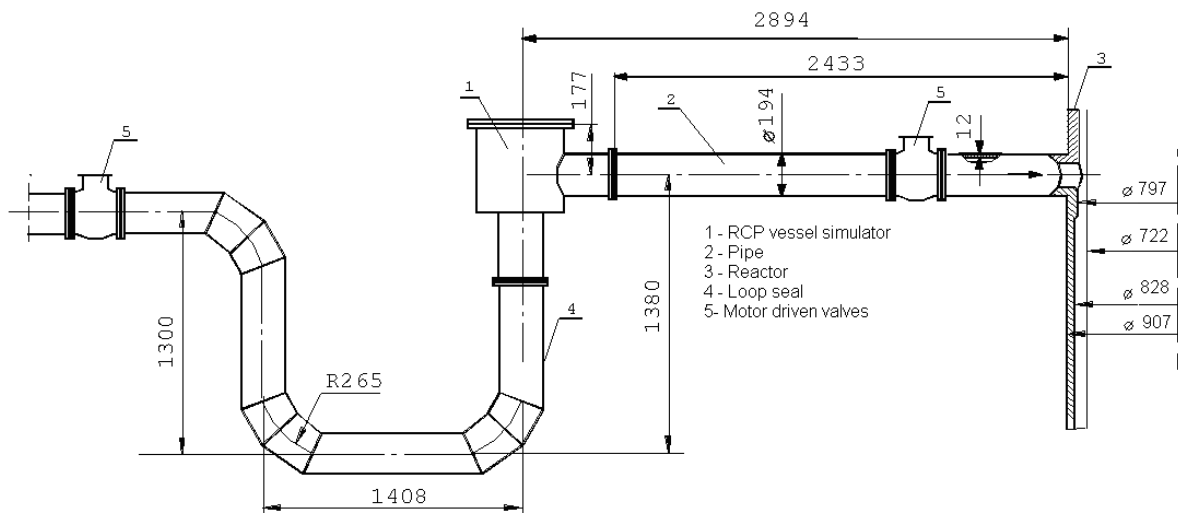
Geometrical dimensions of loop seal and inlet pipe
